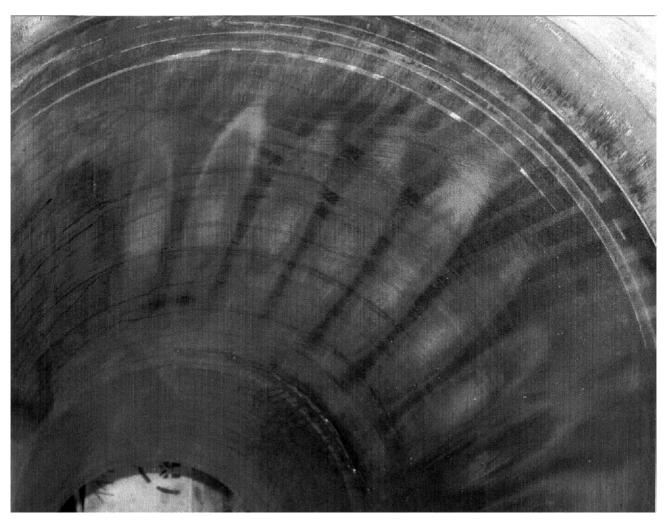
Cylinder liner with hollows and chatter marks, caused by improper rehoning
